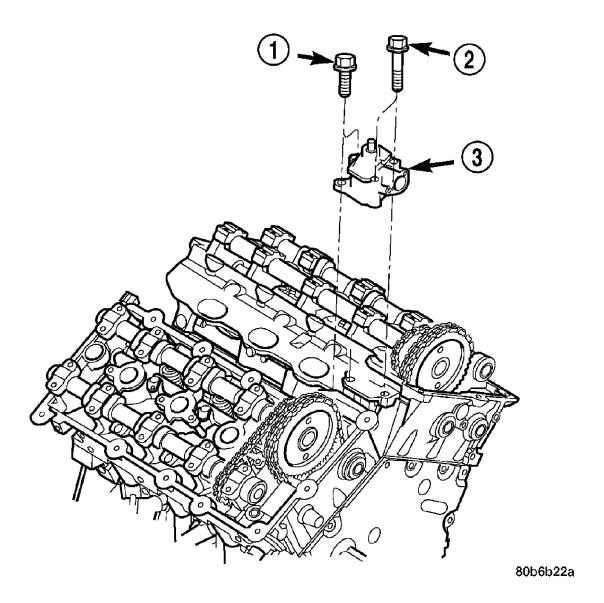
Identifying Coolant Outlet Connector - 2.7L Courtesy of CHRYSLER LLC
